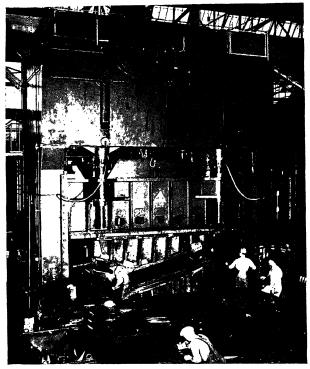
Cold-working a steel strip into body parts for automobiles. In the foreground flat sheets are being prepared for the press. Practically all metal before being cold-worked must be lubricated to protect dies from excessive friction and wear. (Chevrolet.)
